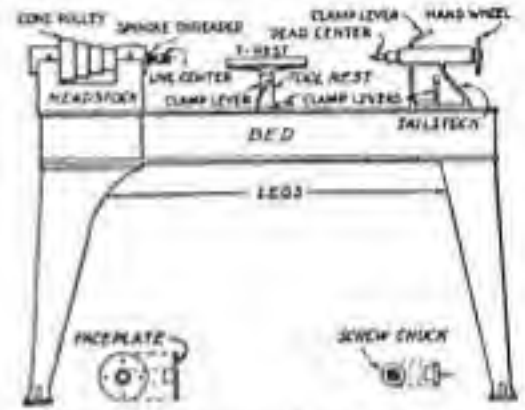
A typical wood turning lathe. All lathes have substantially the same parts.
